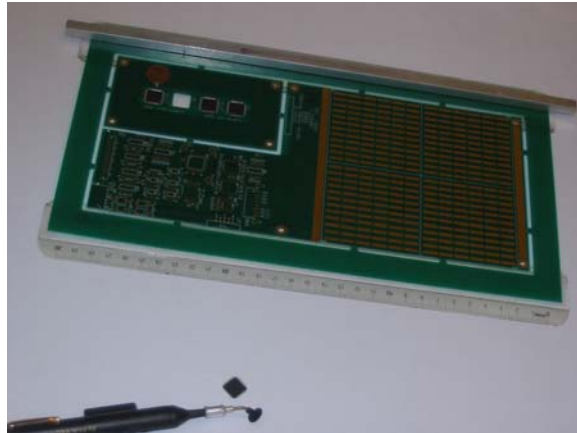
A PCB of the new design, with readout ASICs attached to the back of the wafer PCB.
